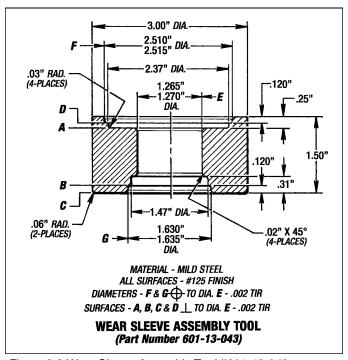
Wear Sleeve Assembly Tool #601-13-043
